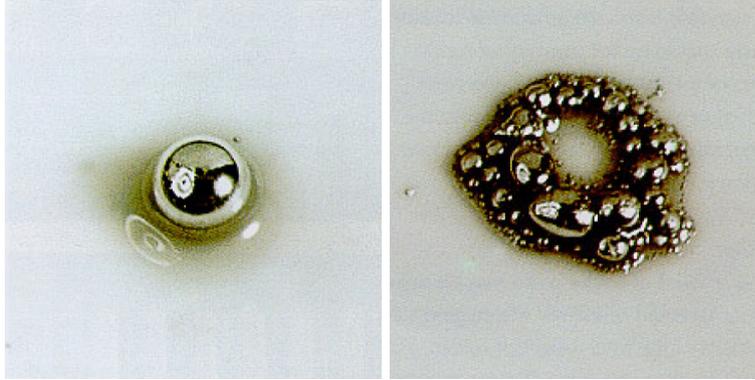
Two examples of solder balls. Left is a good single ball. Right is a bad soldering result and requires rework. The bad result is because of prolonged heating or too high temperatures. Source: [10].
